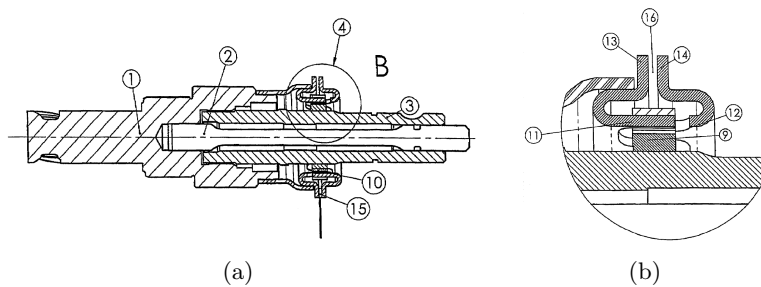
Drawing of a torque sensor using a magnetic rotor and stator assembly, (a) with input and output shaft (1,3), torsion bar (2), stator assembly (10) and Hall sensor (15). (b) Detail of sensor with multi polar magnetic ring (9), ferro magnetic stators (11, 12) with flux concentrators (13, 14) and air gap for Hall sensor (16). [8]
